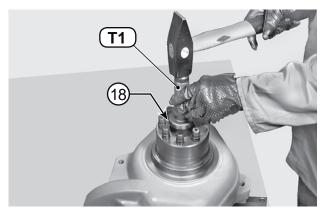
Using driver T1 (See drawing T1 p. 26), extract the guide bushing (18) of twin u-joint.
